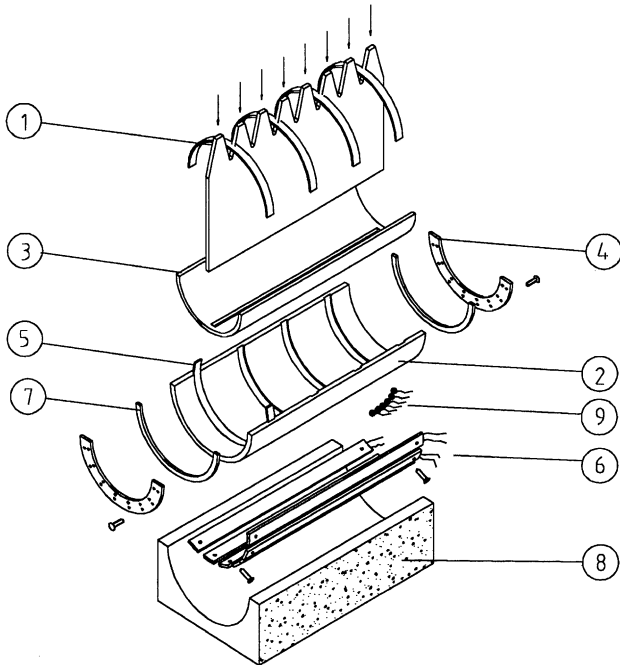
An exploded view of the major components of heat transfer section. 1: Air-plenum; 2: impingement surface; 3: upper wall; 4: side wall; 5: data collecting ring; 6: heating strip; 7: end face insulation; 8: insulation; 9: thermistor.
